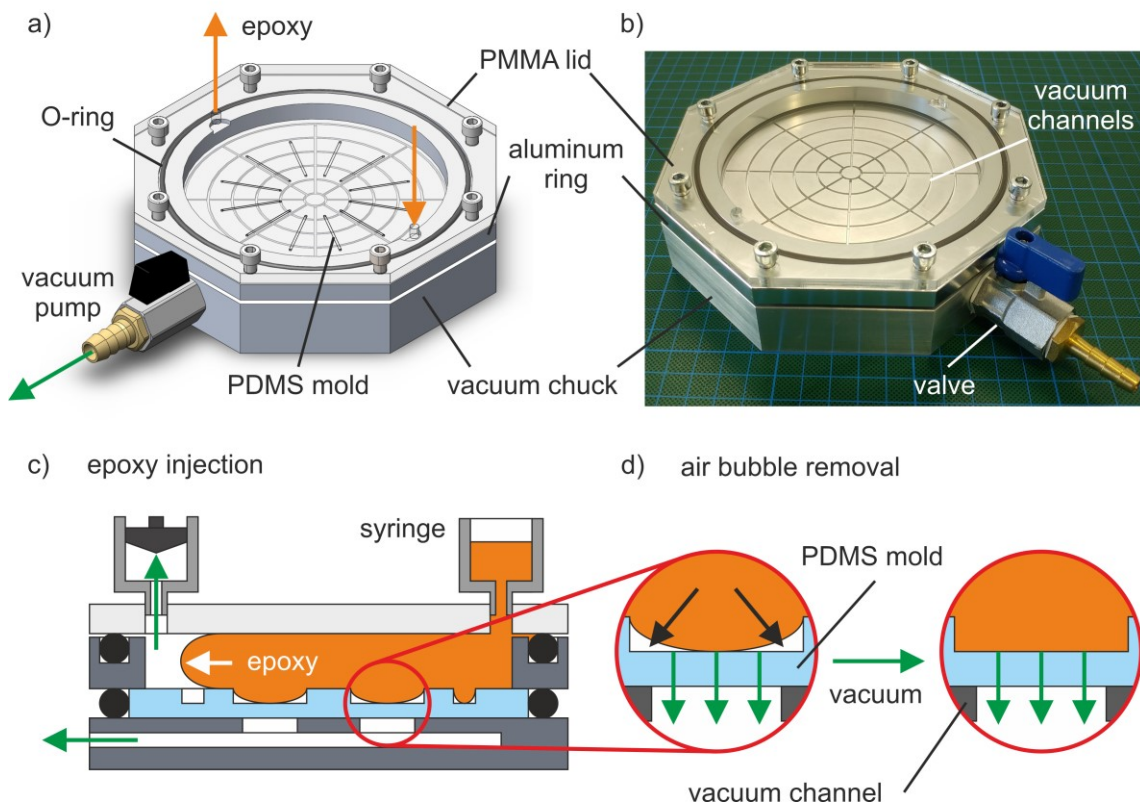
Epoxy molding tool: a) 3D view of the CAD model and b) photograph of the epoxy molding tool for replica molding of PDMS structures with epoxy resin. b) Epoxy resin injection into the molding tool and c) air bubble removal by applying vacuum underneath the PDMS mold. a, c, d) adapted from Ref. [227] with permission from the Royal Society of Chemistry available under the CC BY-NC 3.0 license and b) adapted from Ref. [228] available under the CC BY 4.0 license.
